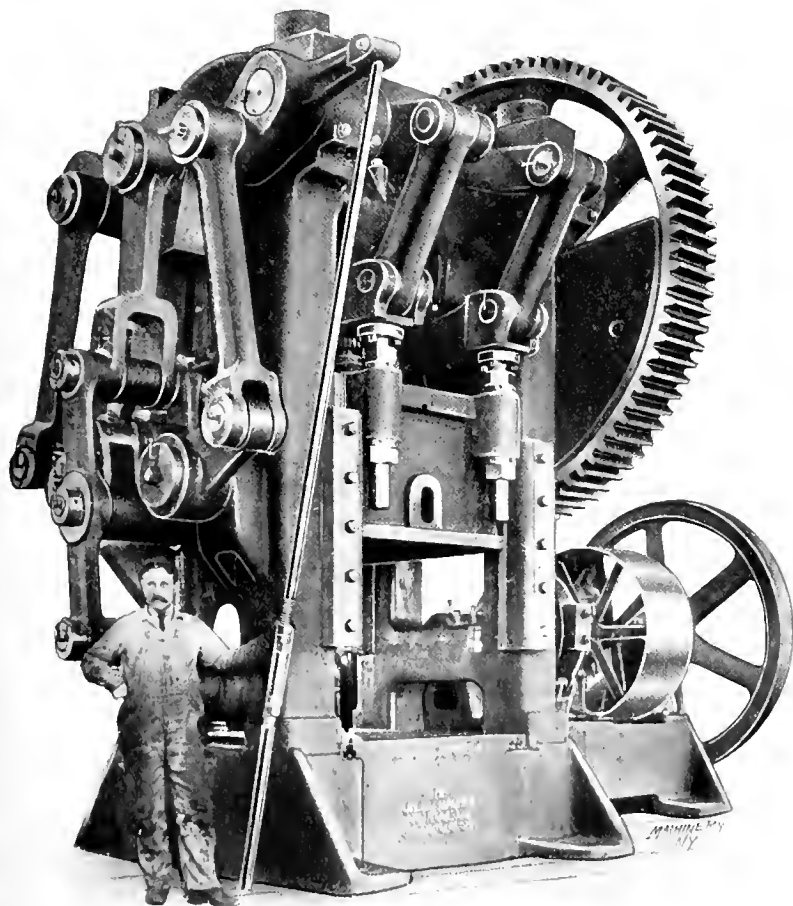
Heavy Drawing Press with Blank Holder operated by a Toggle Mechanism.
